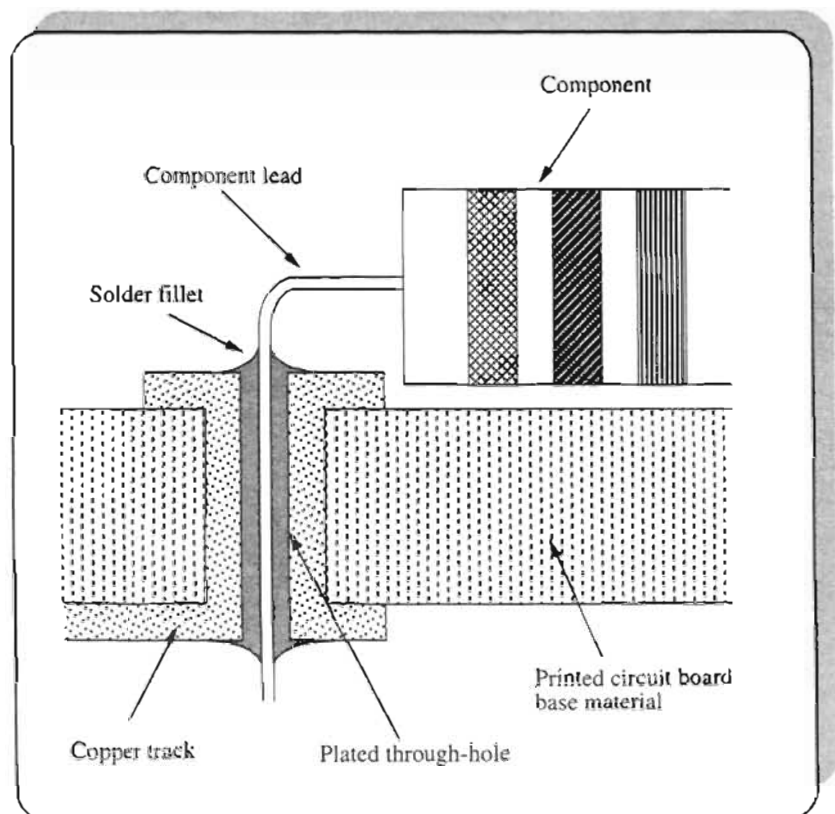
Soldered joint formed between a component lead and copper track on a plated through-hole printed circuit board
